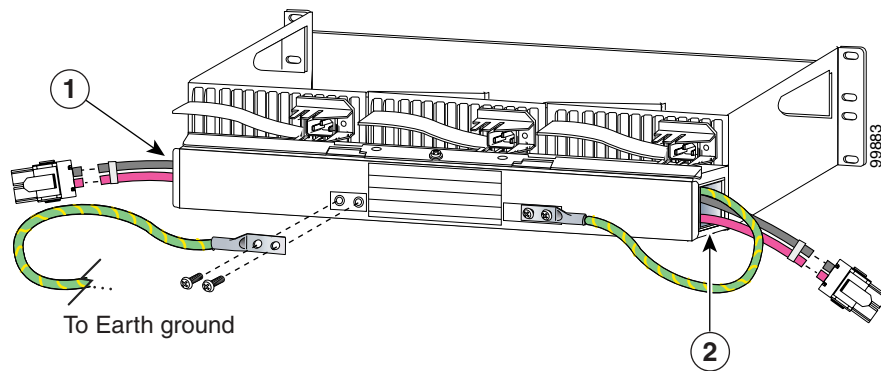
Connecting Cable Wires to the Terminal Blocks
